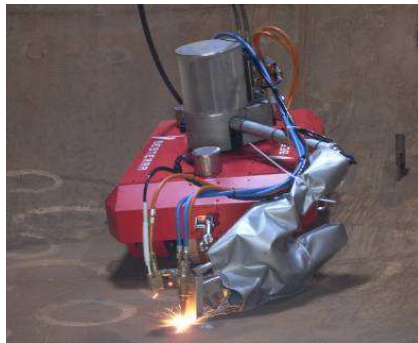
Scaffold equipment for disassembling a stack, and method for disassembling a stack using the equipment
